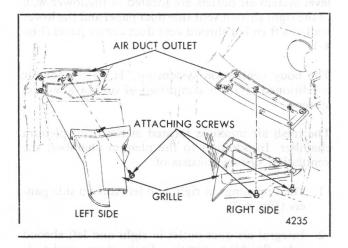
Low-Level Air Outlet Grilles - "B-C-E" Styles ("A" Style Similar)
